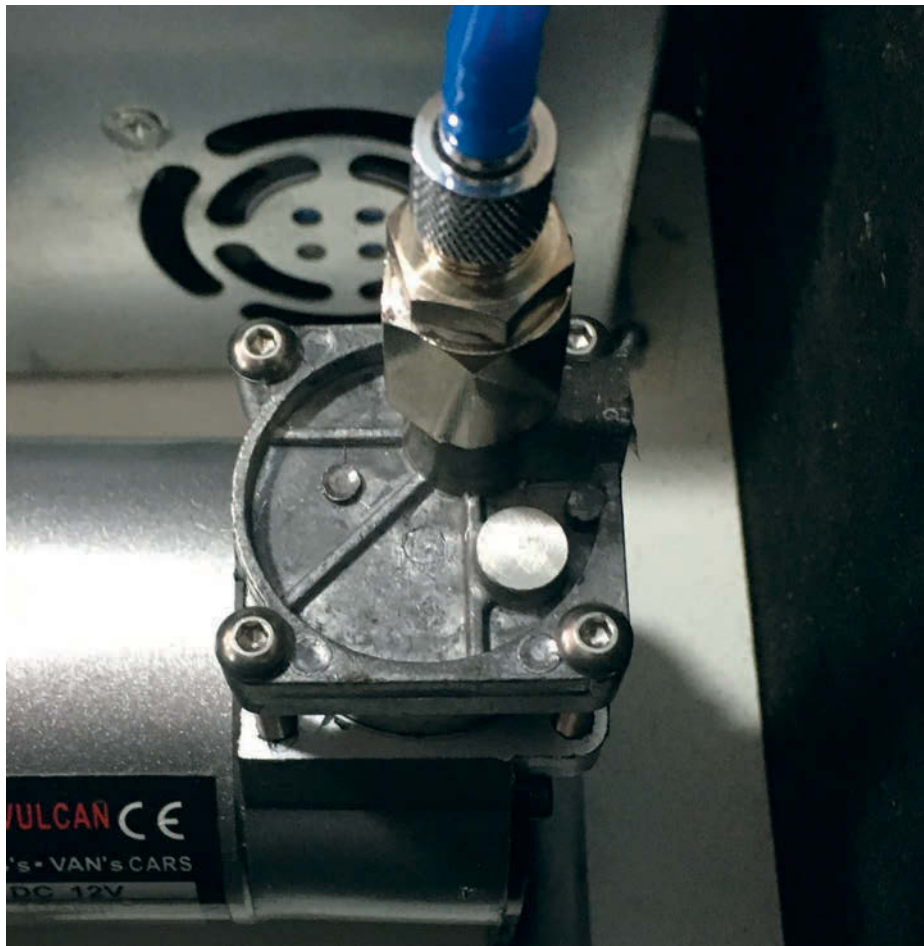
This is the cylinder head back on the compressor with its airline attachment.
